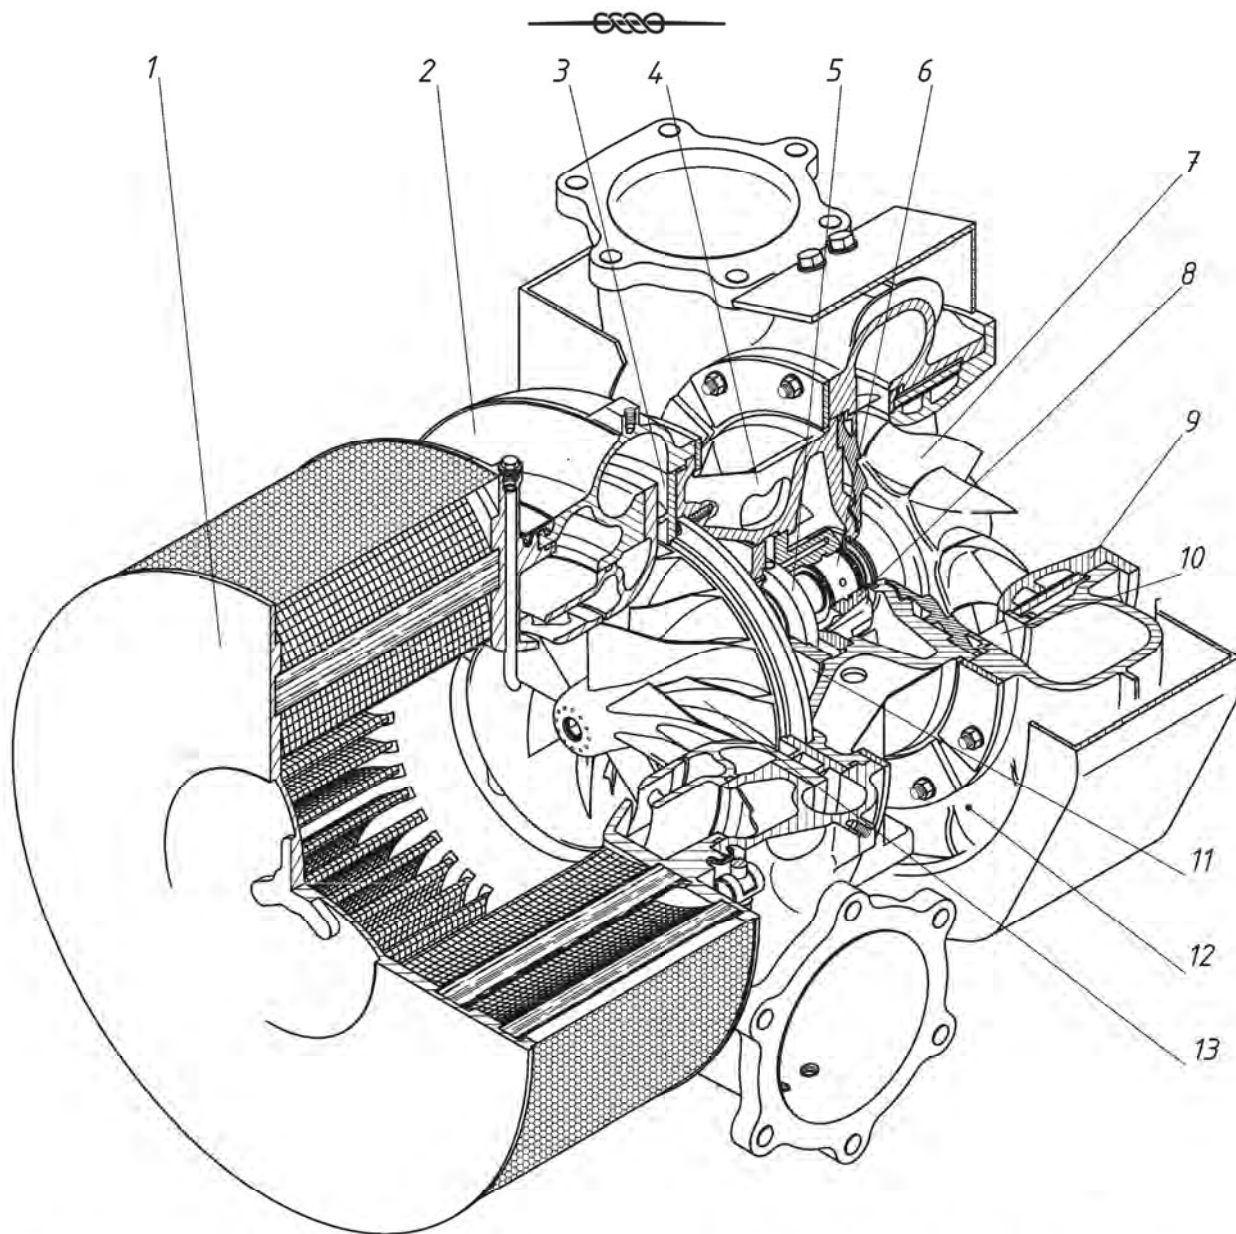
Turbocharger with radial turbine type TPS52-F from ABB: 1 – air filter; 2 – compressor outlet; 3 – diffuser; 4 – bearing housing; 5 – axial bearing; 6 – radial bearing on the side of the turbine wheel; 7 – turbine wheel; 8 – bearing unit; 9 – turbine deflector; 10 – turbine guide vane; 11 – seal on the compressor side; 12 – turbine outlet pipe; 13 – compressor wheel (adapted from [45])
